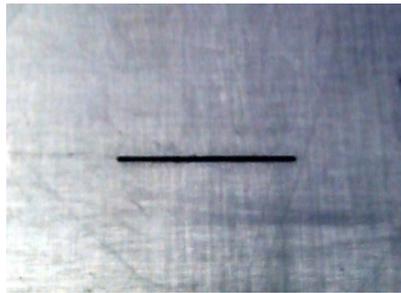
Linear defect machined with 2 cm of length.
